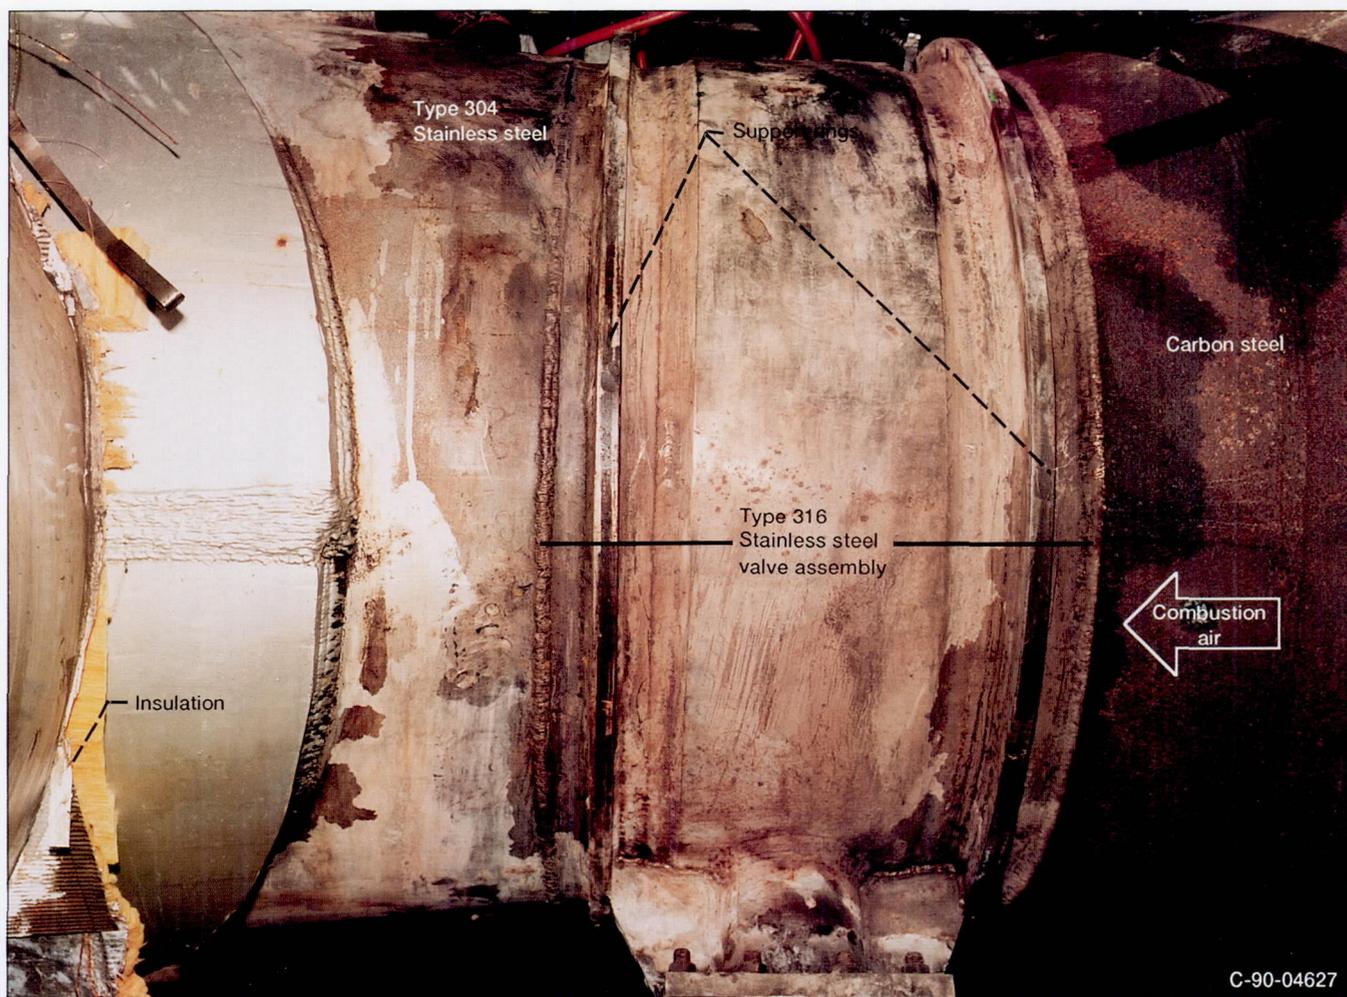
Valve 1V-6 (1.22-m diam) with insulation removed showing dual support rings welded to the valve skirt.
